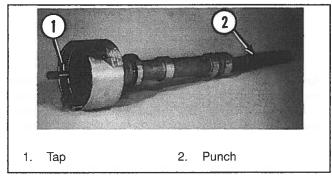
Removing Upper Bushing From Prestolite Distributor
